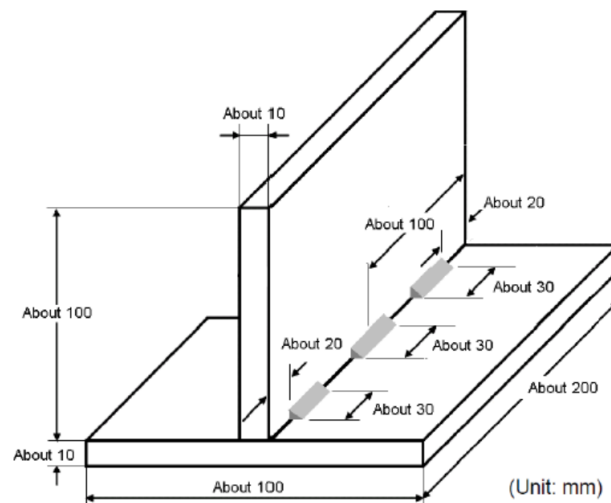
Dimensions and types of test piece for tack fillet welds
